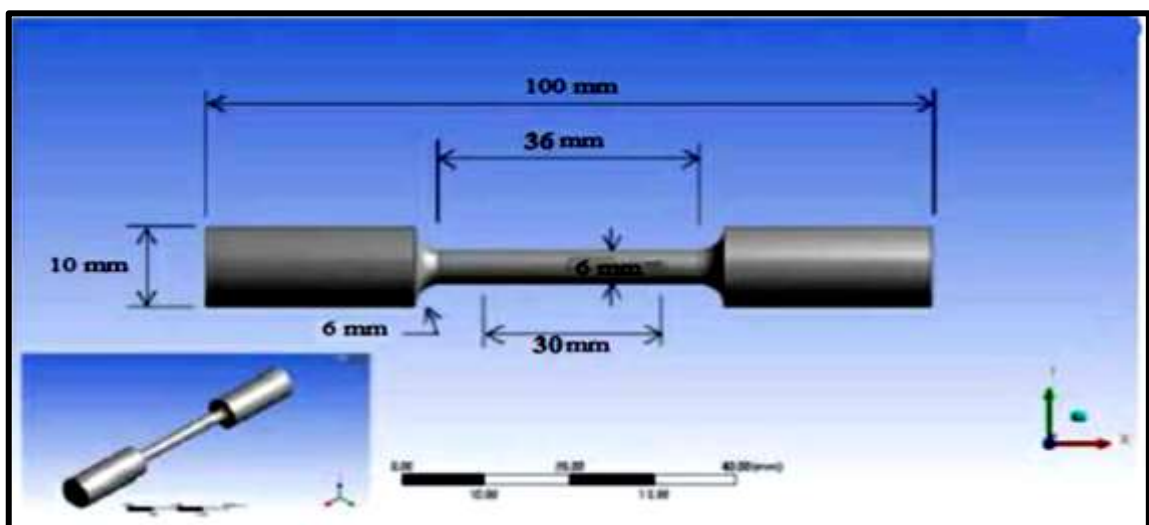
Tensile test sample with dimensions according to ASTM.
